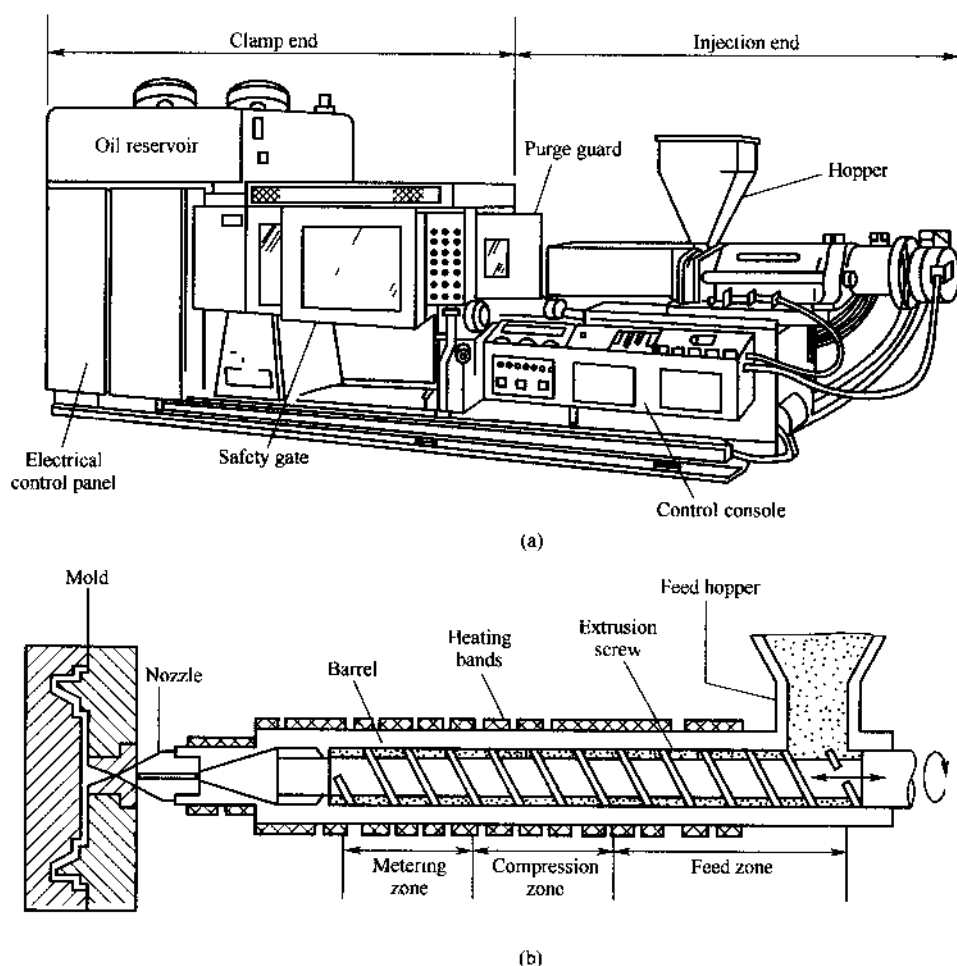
(a) The injection-molding machine (b) The reciprocating-screw injection system
